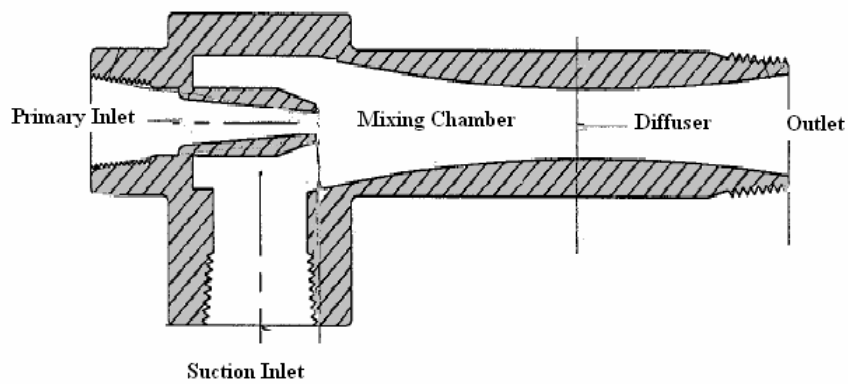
Cross sectional view of a typical liquid jet pump
